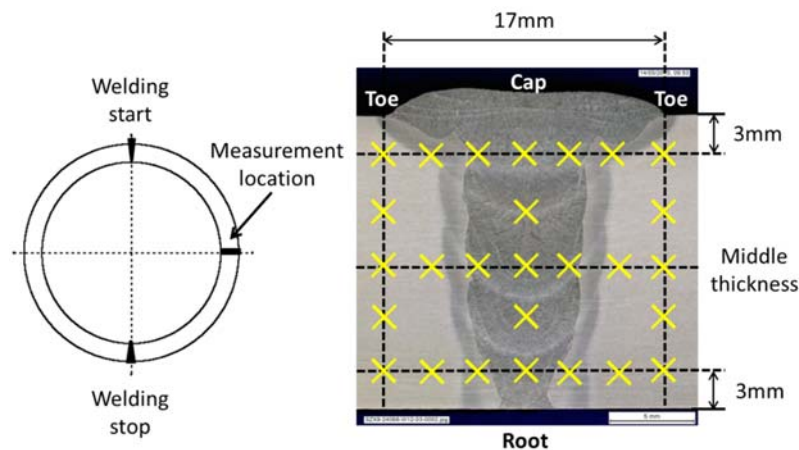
Schematic overview of the welding procedure (left), macrograph of the weld cross section and measurement points in the vicinity of the weld centre (right).
